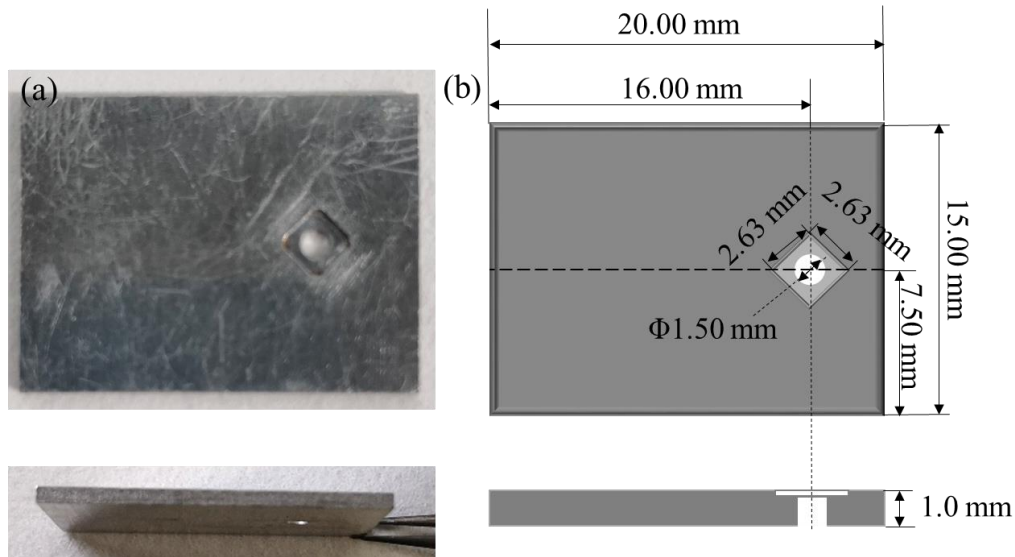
(a) Photograph of an aluminum plate for fixing the TEM grid. (b) Schematic illustration of the detail design of this plate.
